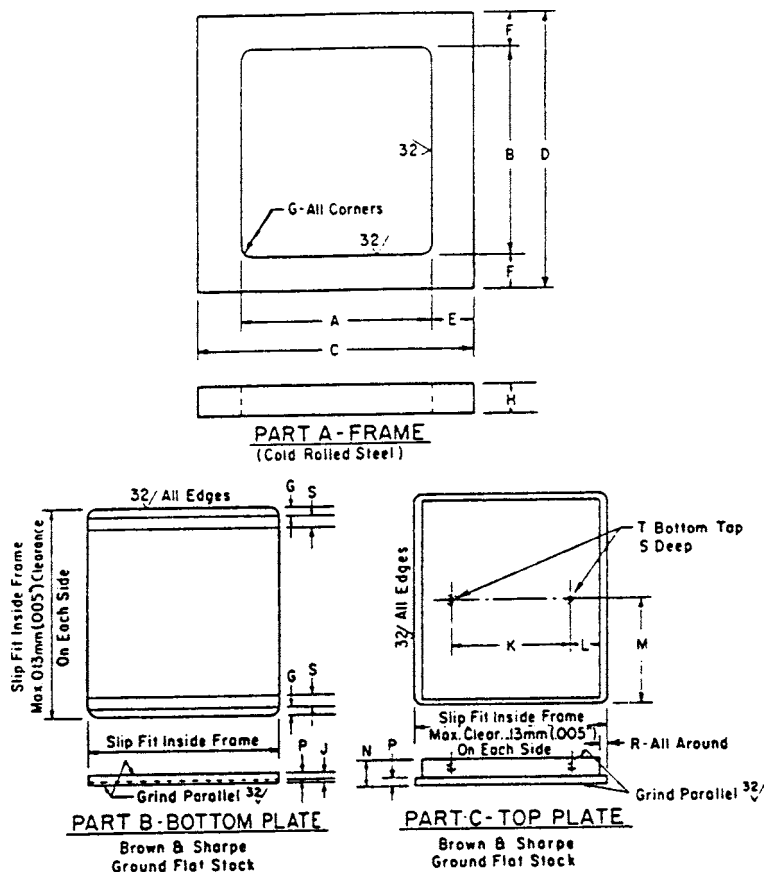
Strap Peel Adhesion Testing Specimen Mold
